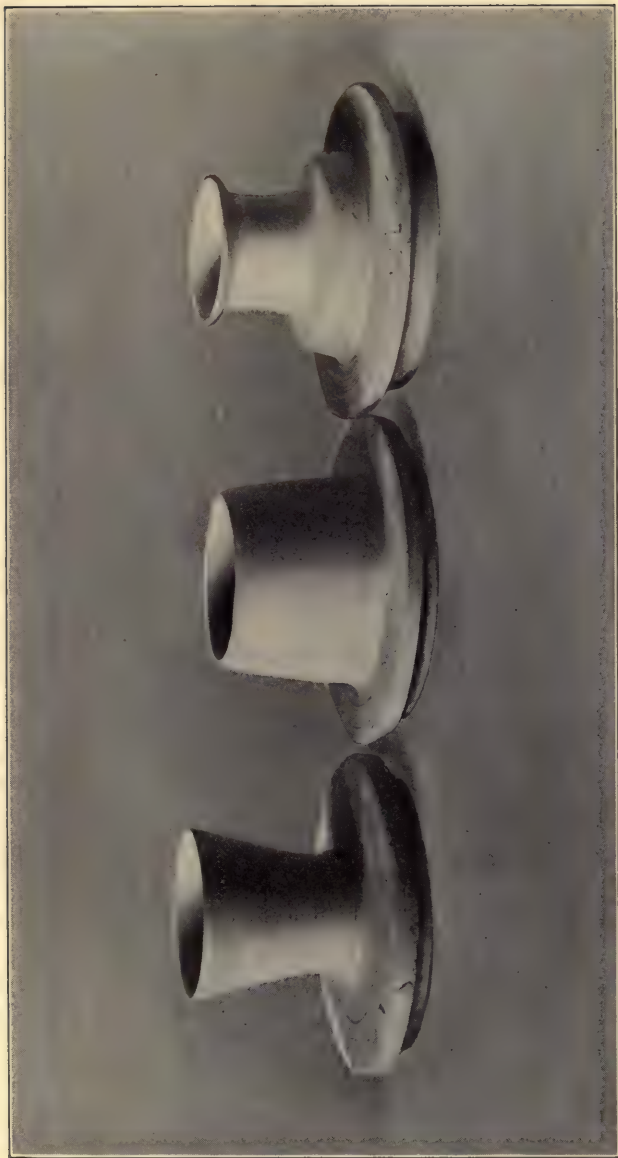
PLATE XVIII. MAKING LARGE PIECES. The Three Sections Completed.
